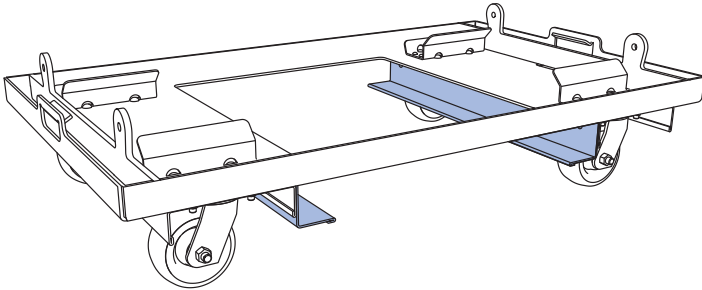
MCF-2100 Caster Frame, Forklift Guides Installed
